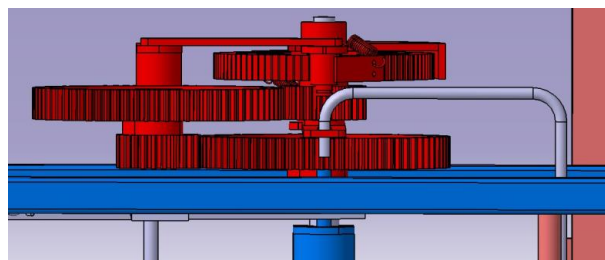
5-Wheel gear mechanism top view of De-sign semi-automatic handloom
